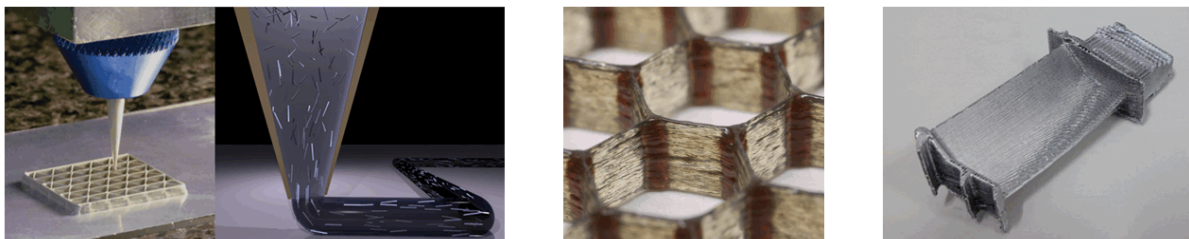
3D printing of lightweight cellular composites (left and center) [Compton and Lewis, 2014]. 3D Printed CMC turbine blade after processing in a 1450C furnace (right) [www.compositesworld.com].
